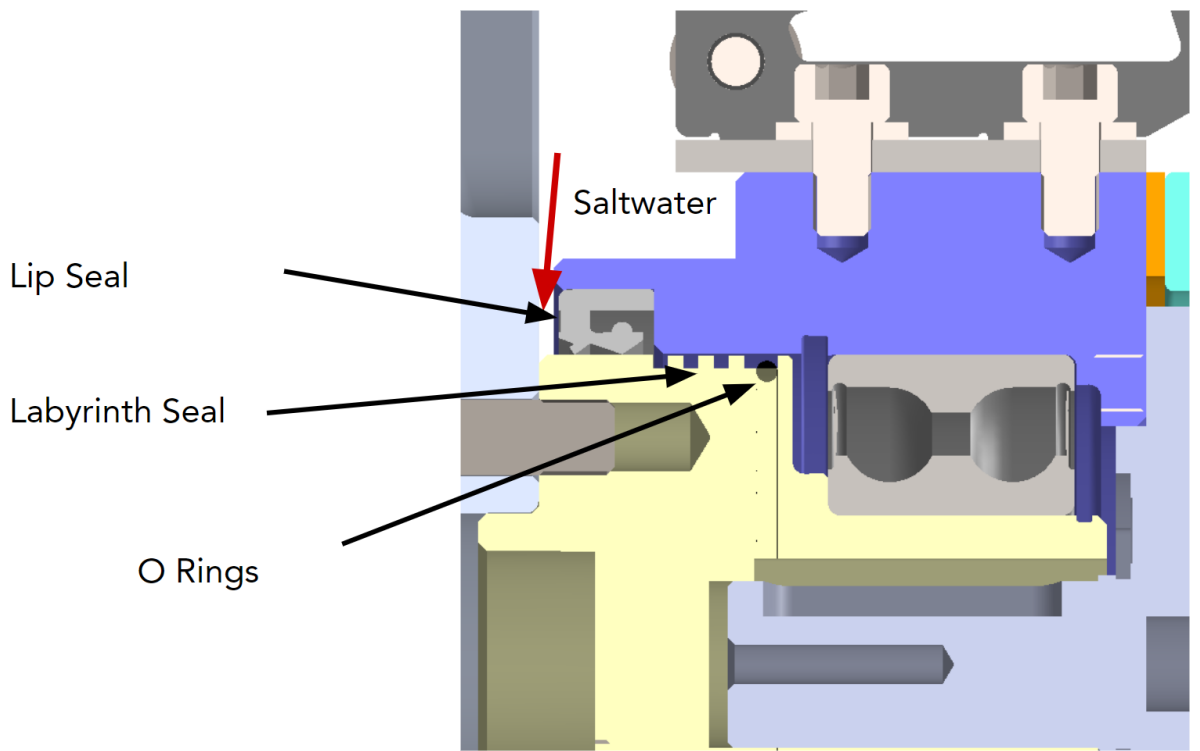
Cross section of the motor assembly outer seal. Note the teeth of the labyrinth seal, together with the o-ring groove are integrated into the wheel hub to form a rotating seal. Additionally, the two races of the double-row angular contact bearing used can be clearly seen. The enclosed volume, shown here as the region to the right of the o-ring is filled with oil for electrical insulation.
